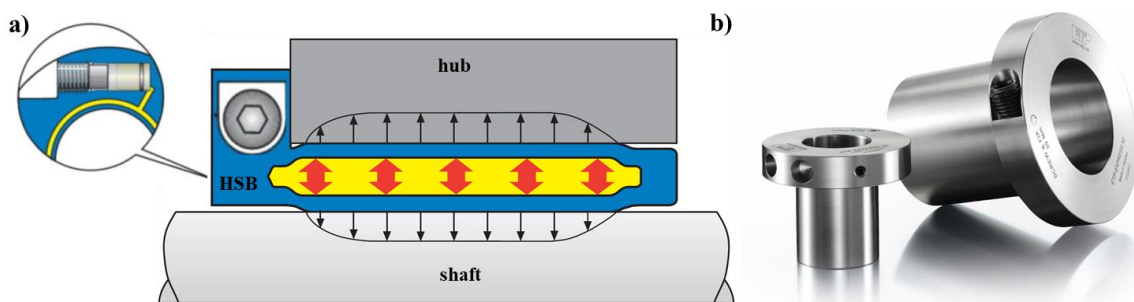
Hydraulic clamping bush a) operating principle b) ETP metal Express bushing
